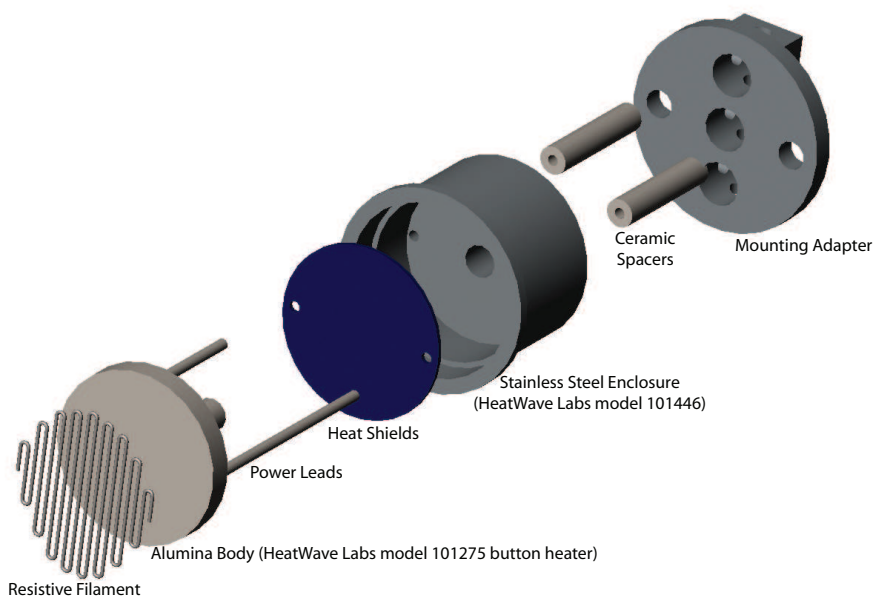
Design of the PLD substrate heater and mounting adapter. See Figure 4.6 for a picture of the final assembly.
